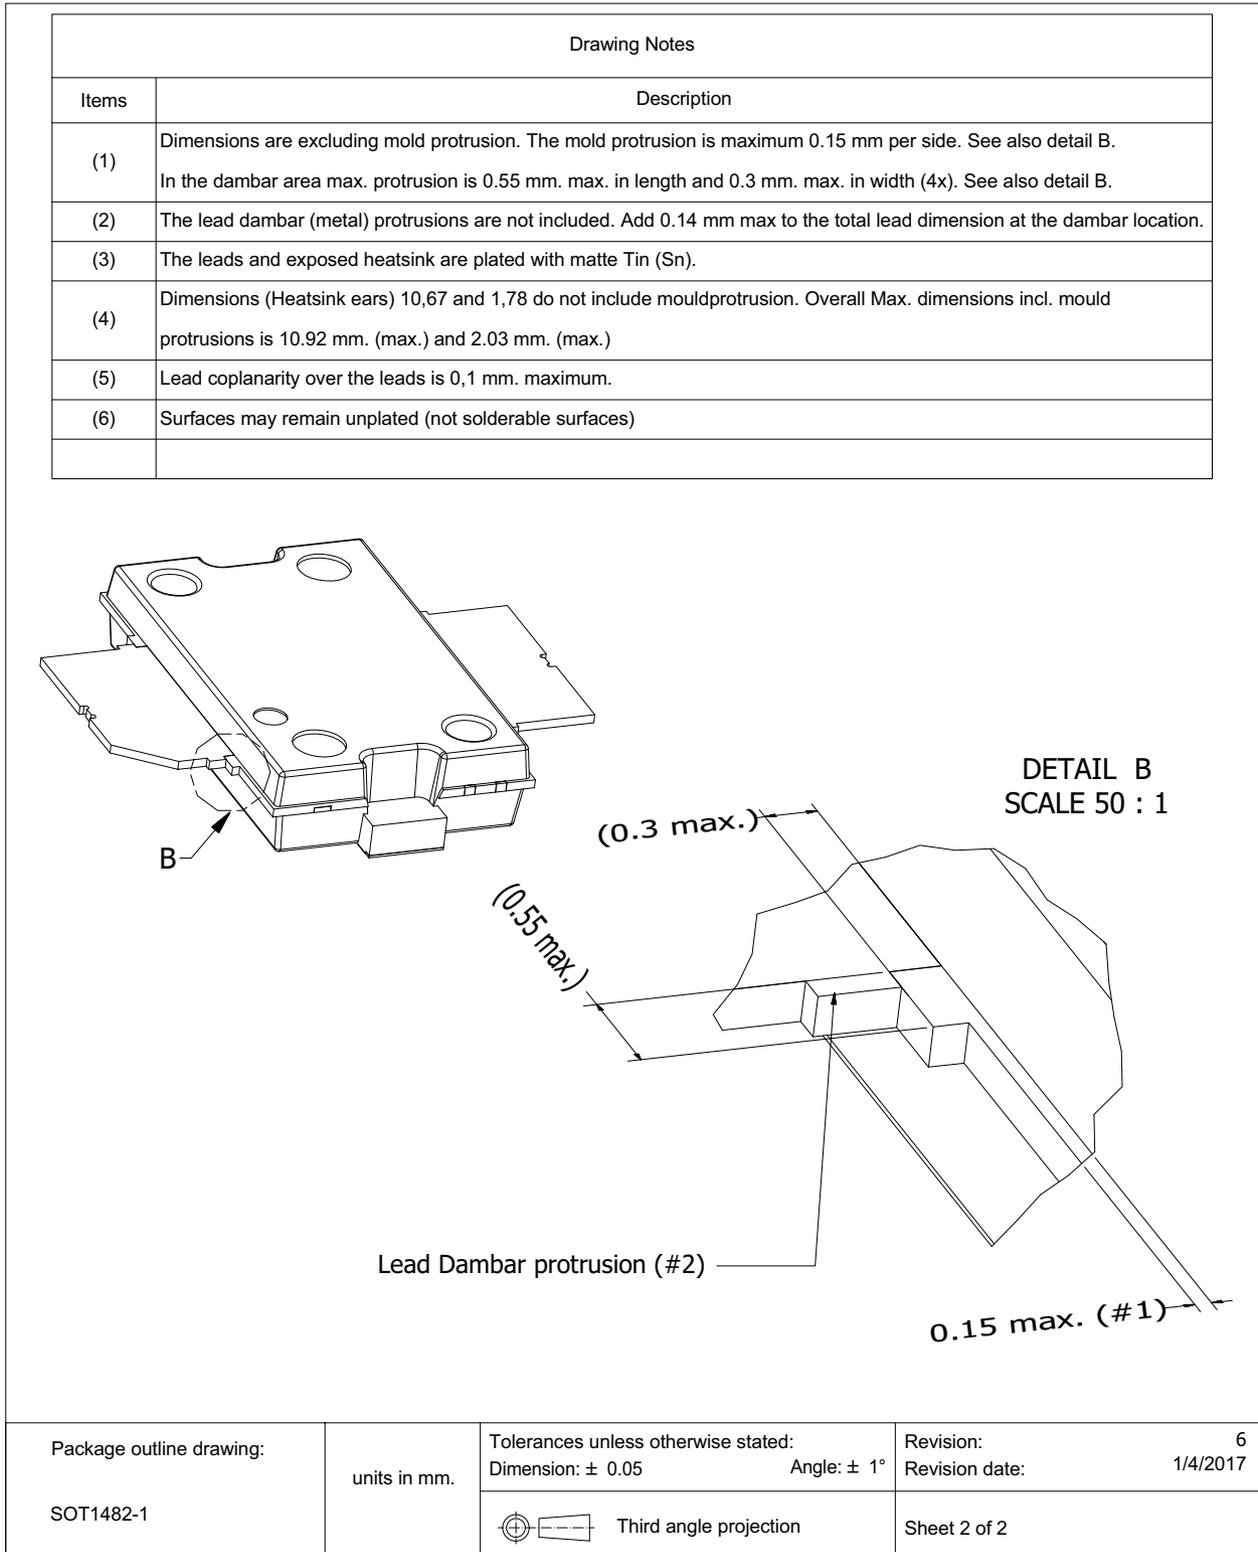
Package outline SOT1482-1 (sheet 2 of 2)
